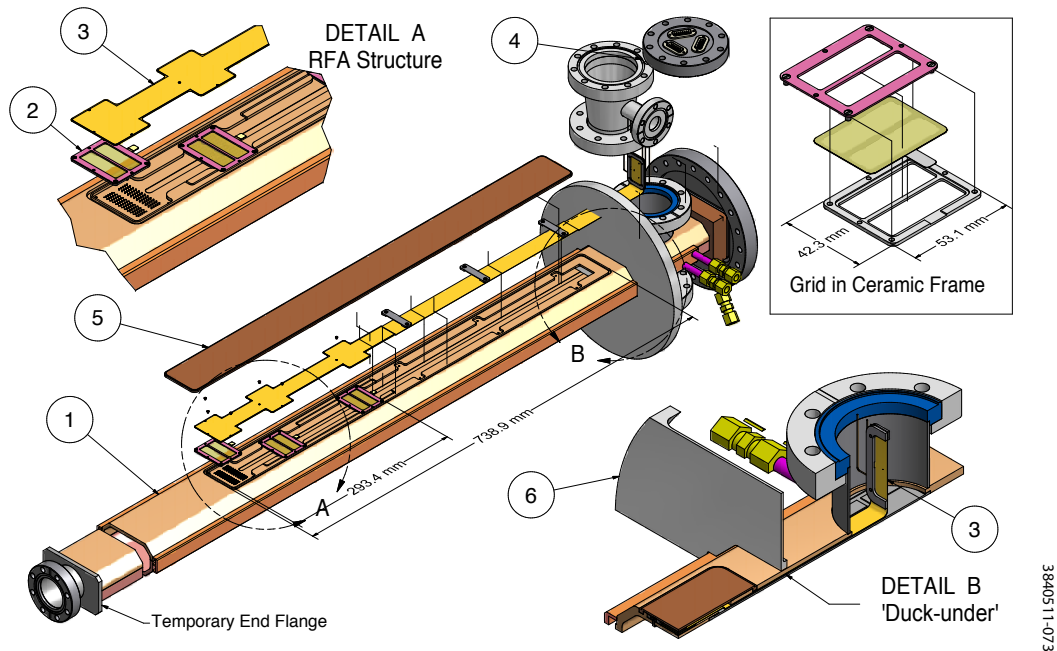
Exploded View of a SCW RFA beam pipe Assembly. The key components are: (1) beam pipe top half, housing the RFAs; (2) RFA grids (see upper right inset); (3) RFA collector on a flexible printed circuit board; (4) RFA connection port; (5) RFA vacuum cover. The 'duck-under' channel, through which the kapton flexible circuit is fed after all heavy welding is complete, is shown in detail B.
